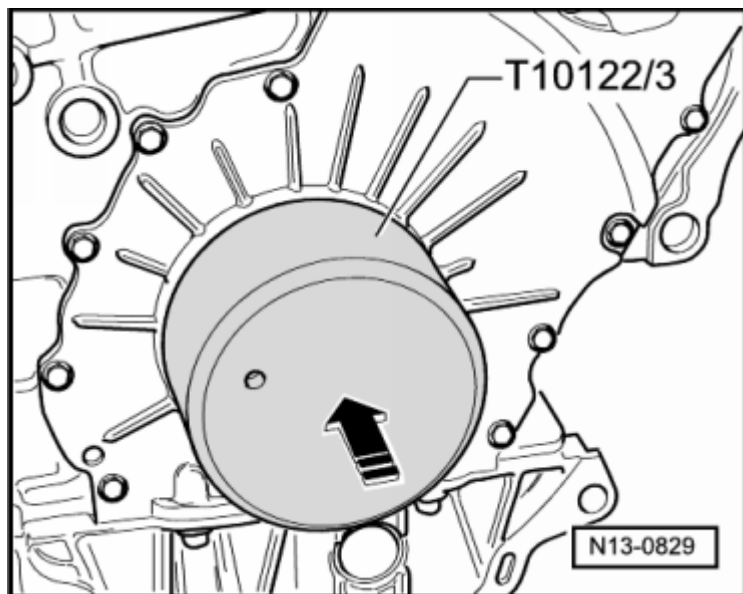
Driving Seal Into Sealing Flange Until Stop Using Thrust Piece T10122/3
